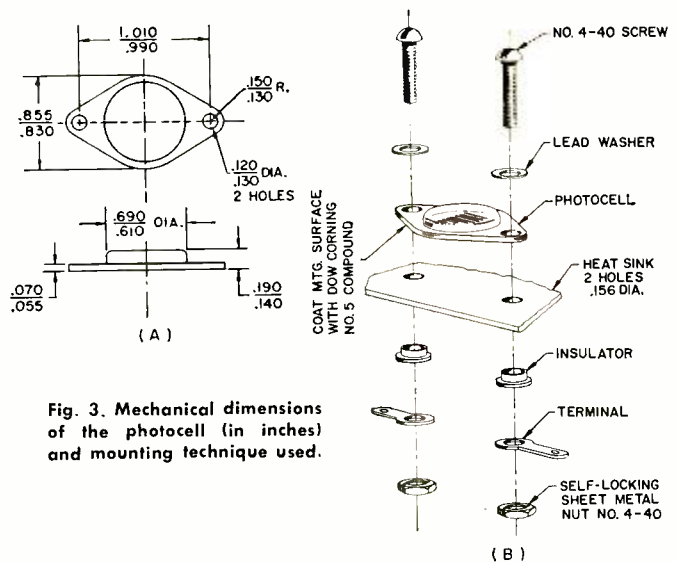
Mechanical dimensions of the photocell (in inches) and mounting technique used.
